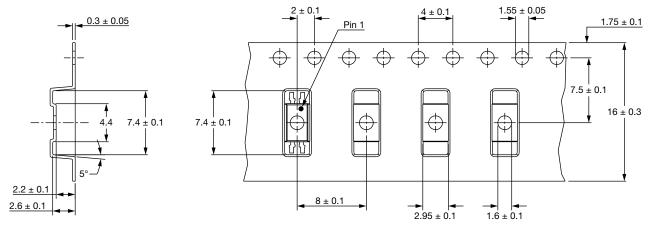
Tape and Reel Packing (3000 parts per reel)
